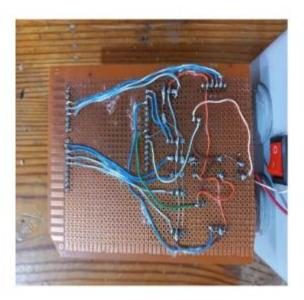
Soldering of components with Arduino Uno on the printed circuit board
